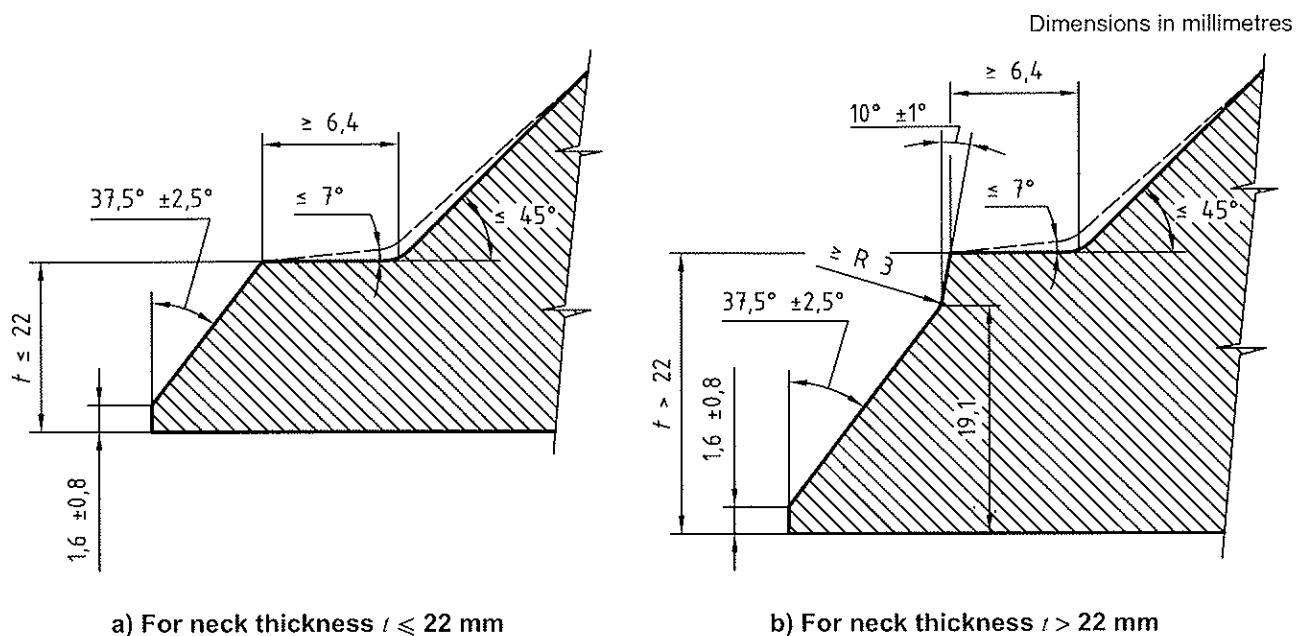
Weld end preparation for type 6B and 6BX weld neck flanges
